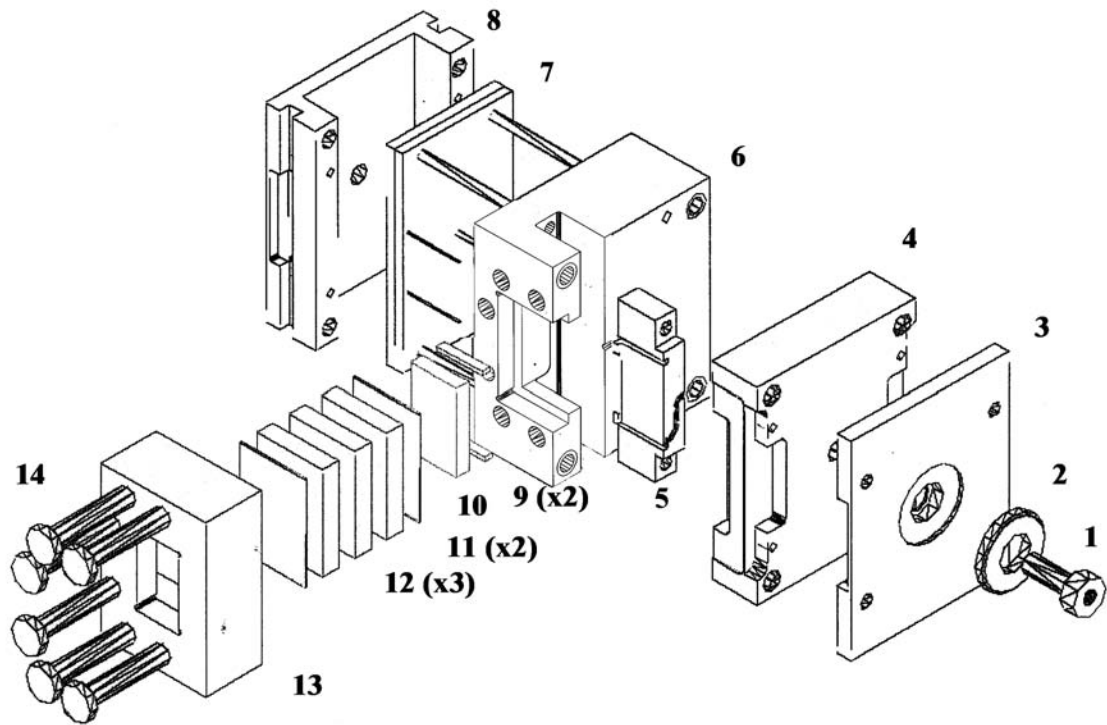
Exploded view of the optical access mold. 1. Sprue bushing 2. Guide ring 3. Top clamping plate 4. "A" plate 5. Cavity block 6. "B" plate 7. Front and rear ejector plates with ejector pins and return pins 8. Rear clamping plate 9. Acrylic entrance and exit windows 10. 0.75" thick quartz window 11. 0.125" thick polycarbonate shields 12. Three 1" thick glass plates 13. Steel window brace 14. Six 1" diameter hardened steel bolts
